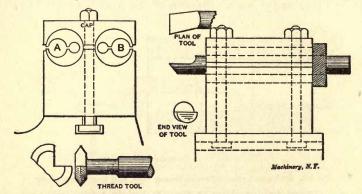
Boring-tool Holder and Type of Inside Threading Tool
